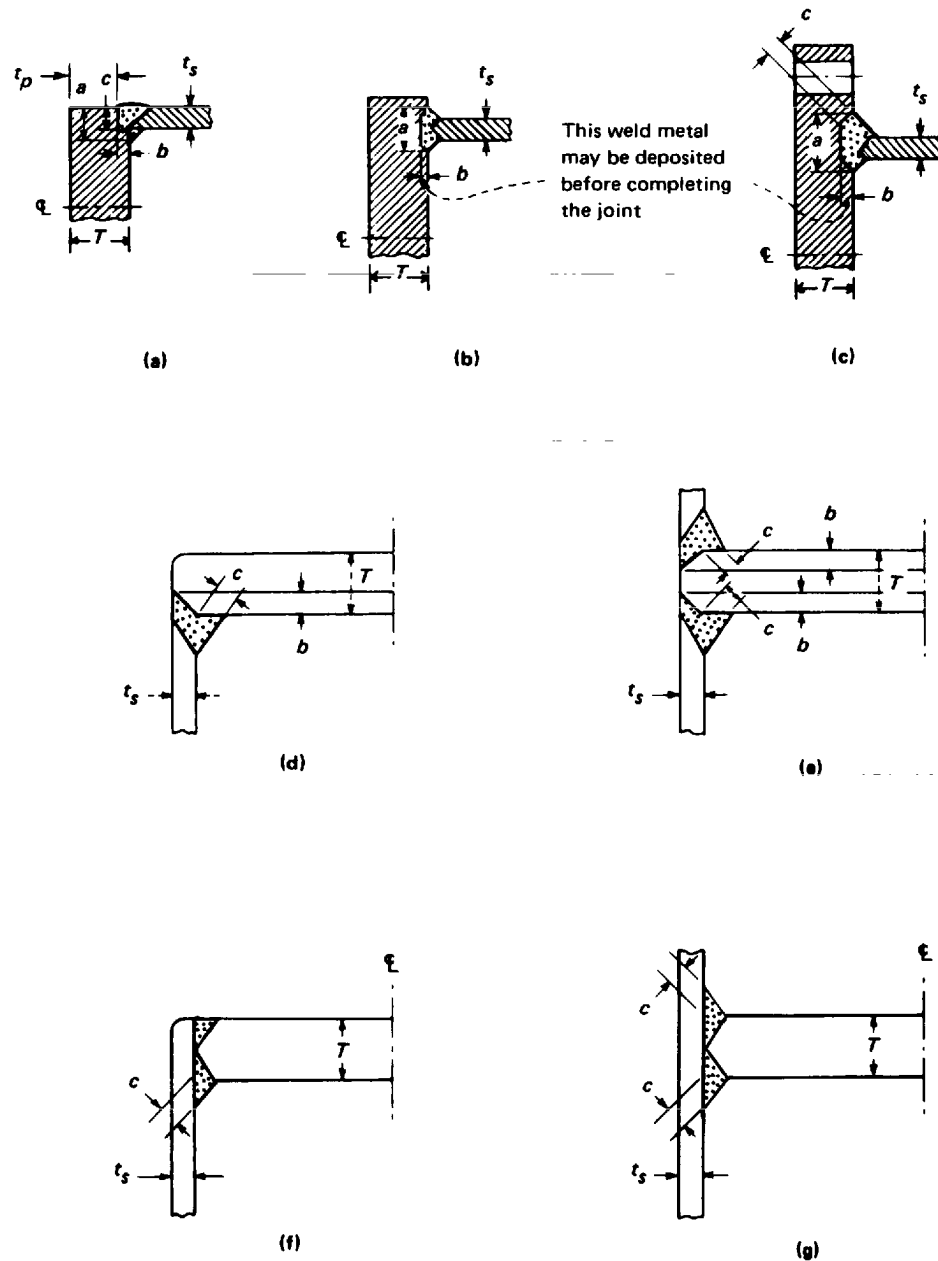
ACCEPTABLE FULL PENETRATION DETAILS TO FORM A CORNER JOINT
